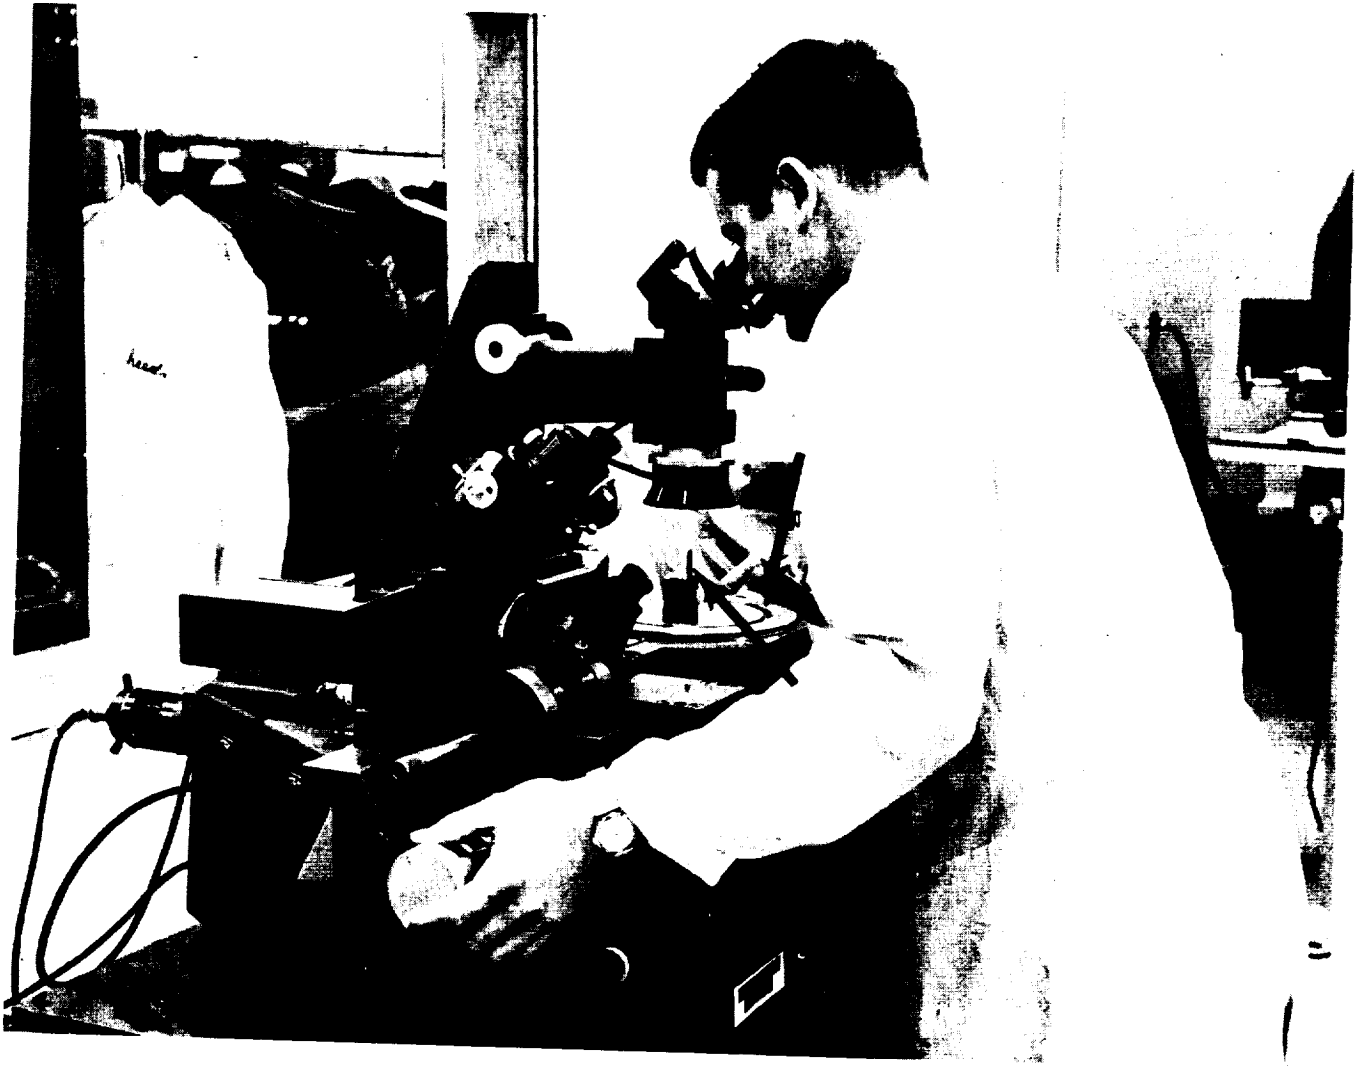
BURR-POINT DRILL BEING INSPECTED ON A MICROSCOPE WITH SPECIAL ROTARY TABLE
